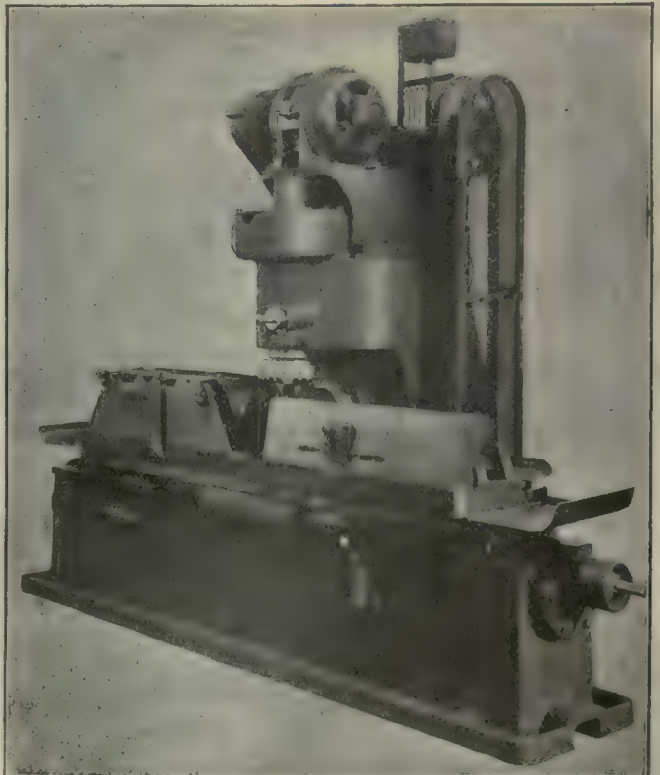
OPEN-FRAME RECIPROCATING-TABLE MILLING MACHINE
